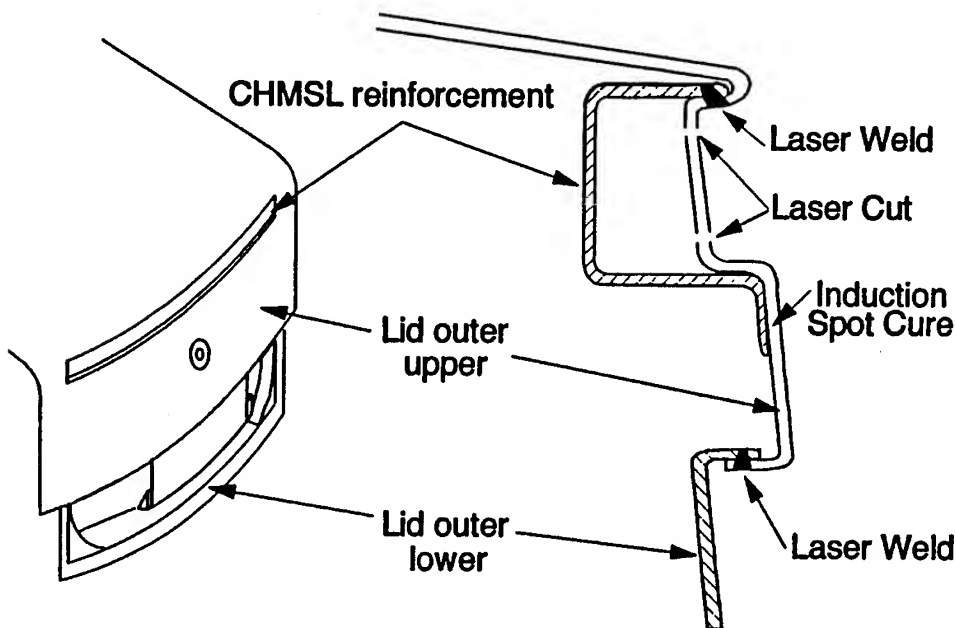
Schematic of center high-mounted stop lamp (CHMSL). Both laser cutting and laser welding are employed.
